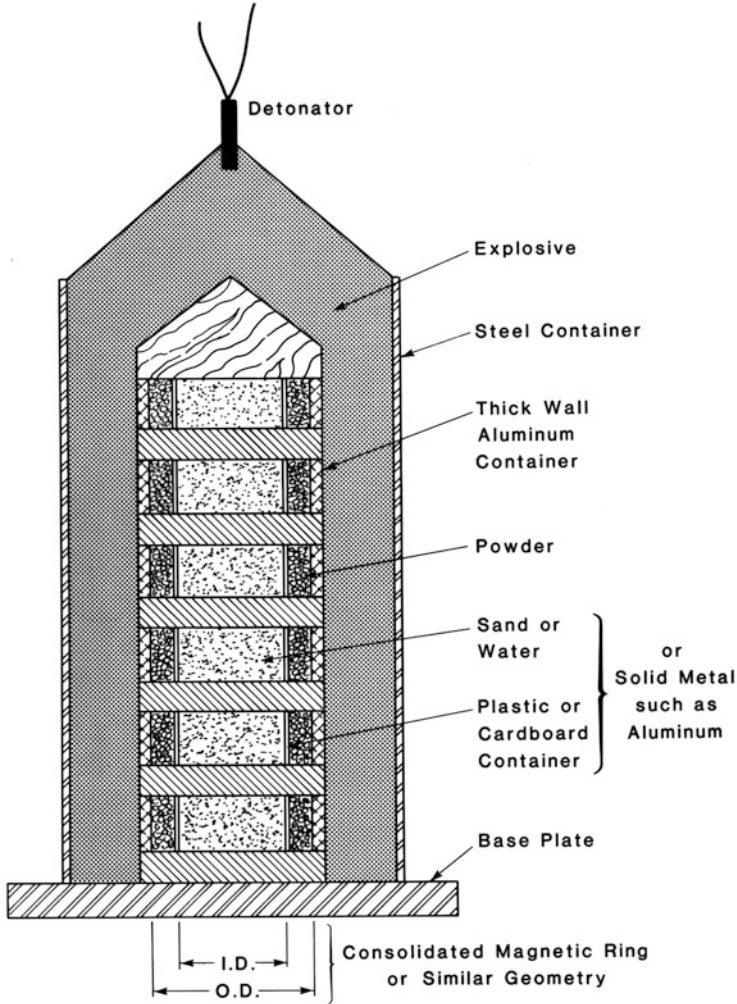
Explosive consolidation fixture for fabricating hollow tube products such as magnetic ring precursors described by Murr and Hare (1984)
